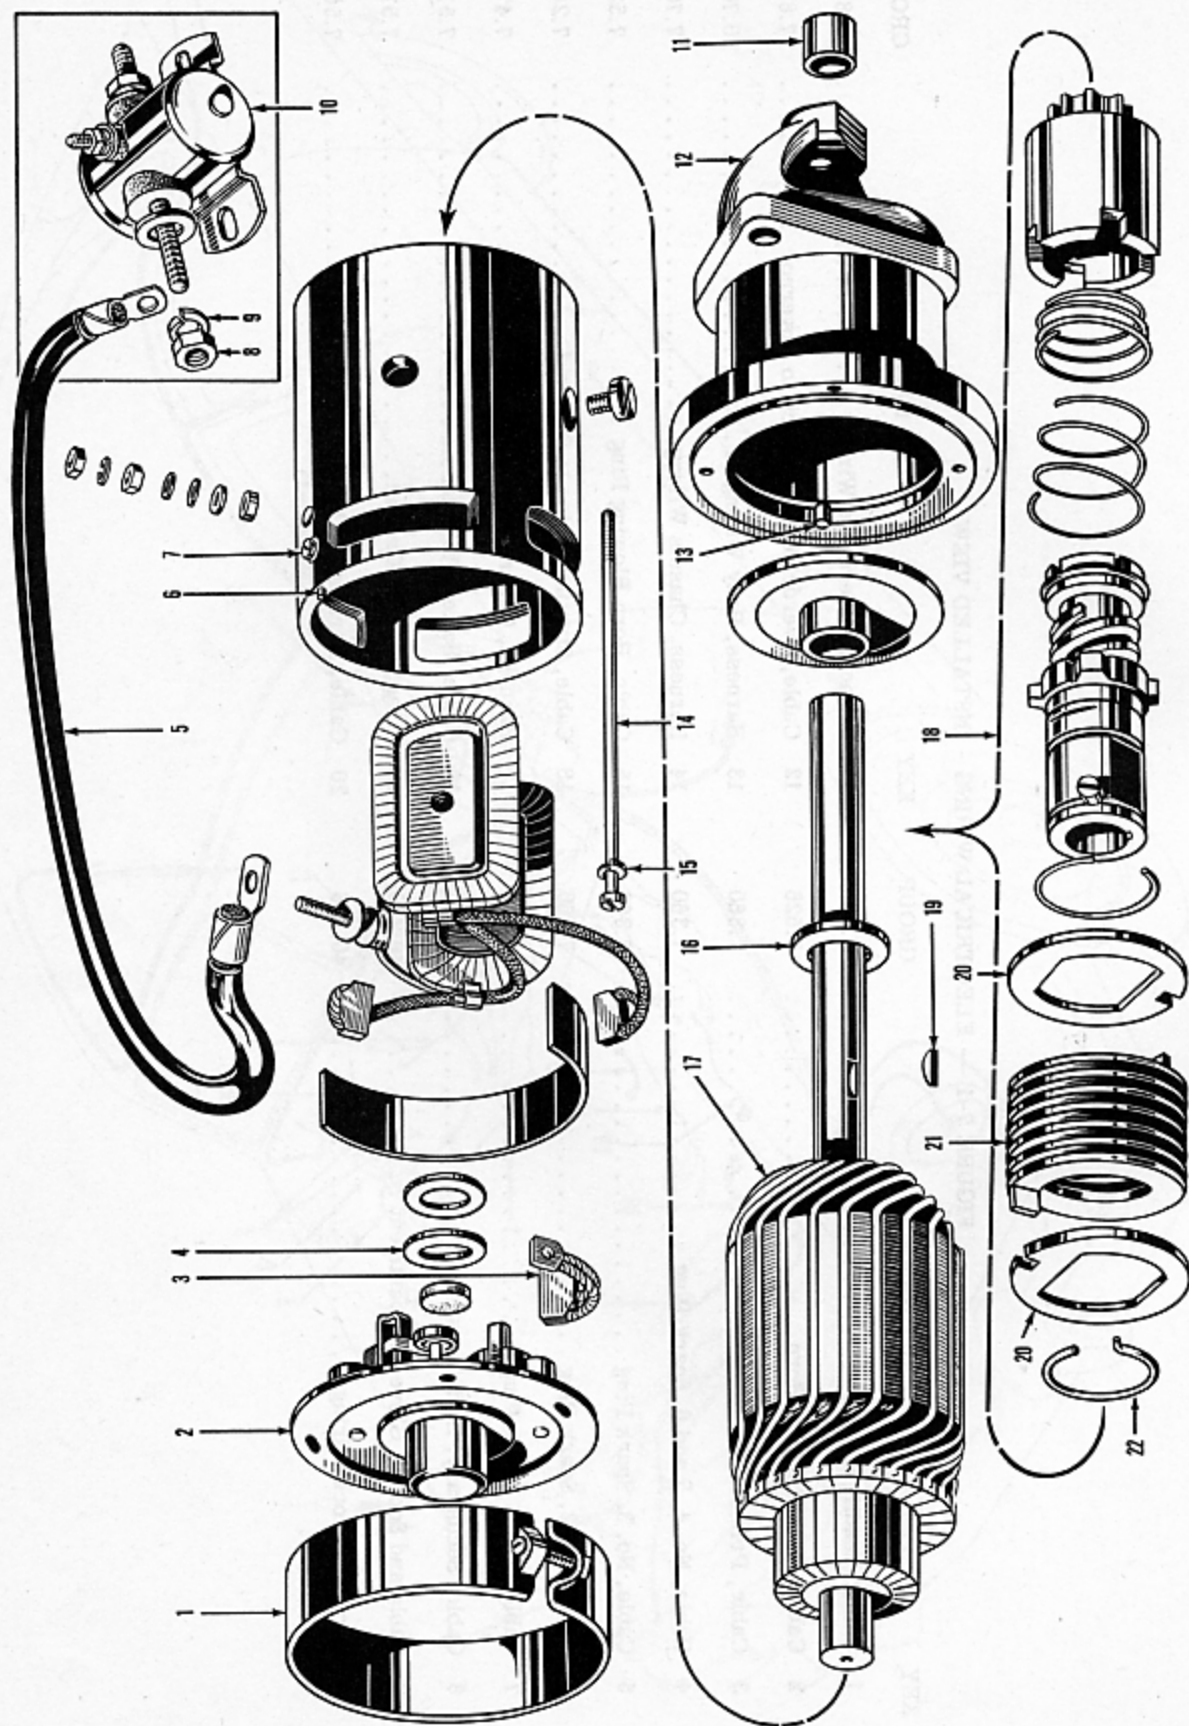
TYPICAL STARTER - EXPLODED VIEW
